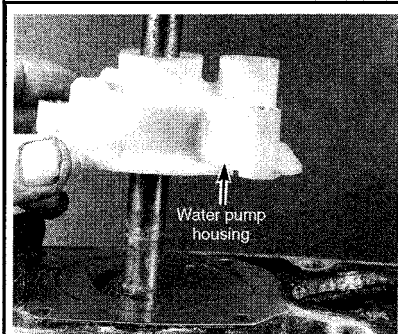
then slide the water pump housing and impeller down the shaft
